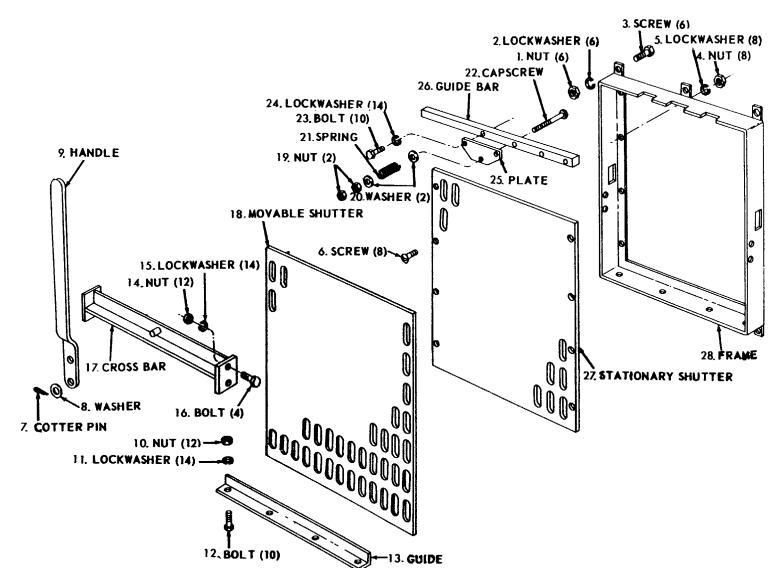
Winterfront, removal, disassembly, reassembly, and installation
